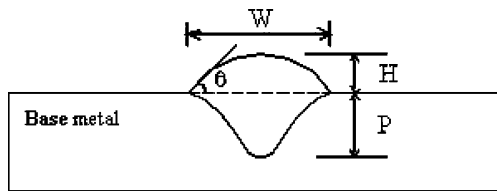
Weld bead nomenclature. W bead width, H reinforcement height, P depth of penetration, θ wetting angle
